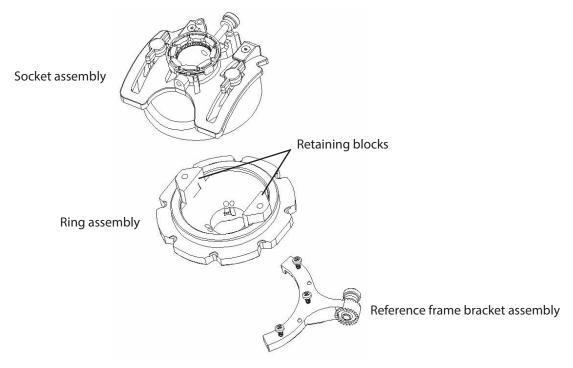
The Nexframe tower assemblies: the socket assembly, ring assembly, and reference frame bracket assembly.
